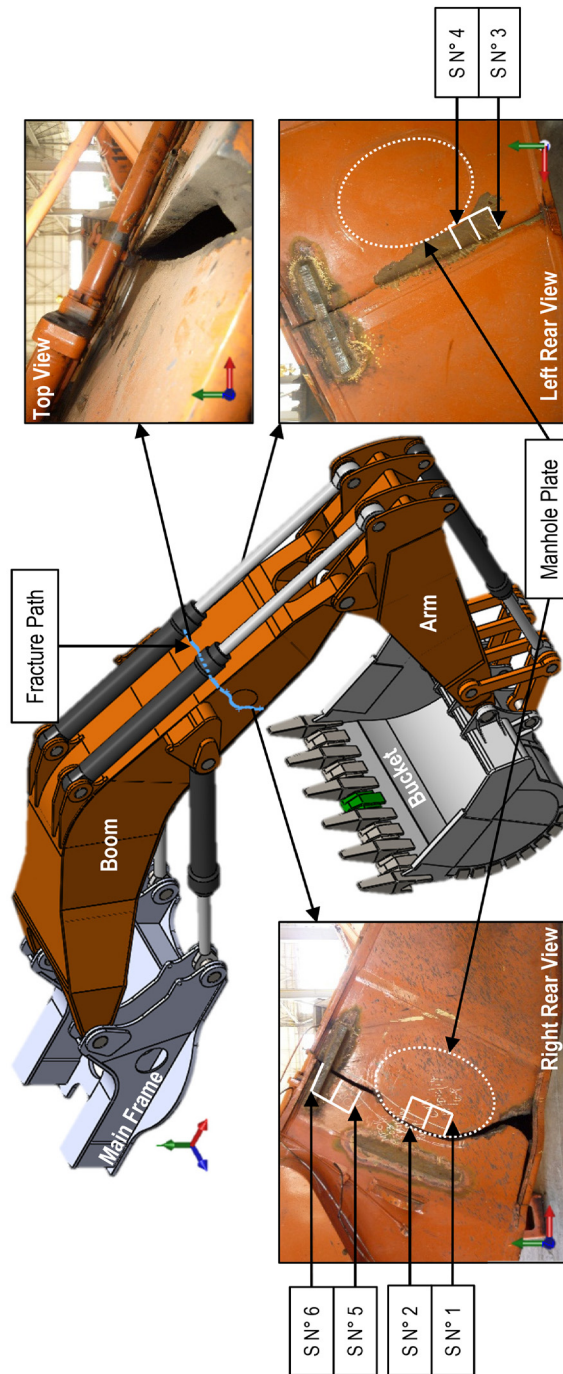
On-site boom fracture visual inspection and sample selection locations.
